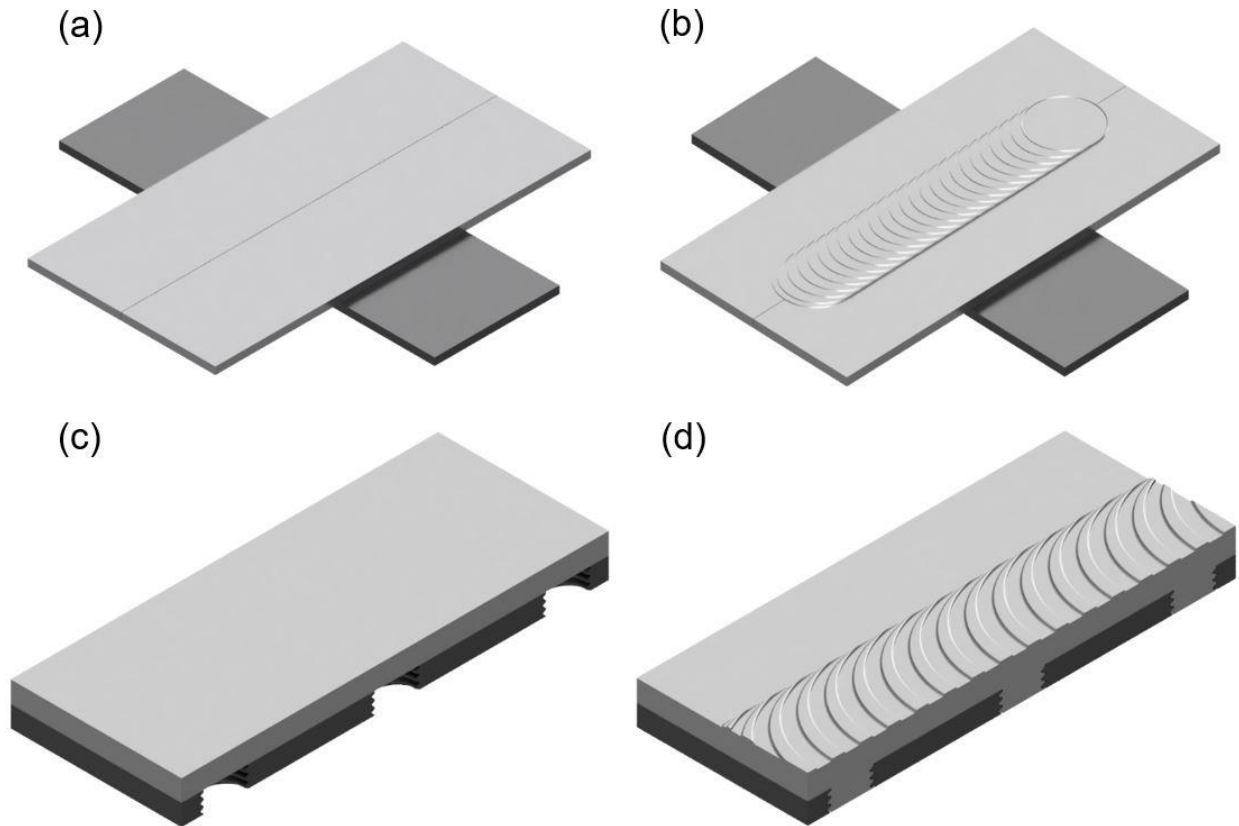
Weld configurations with AA6061 sections above low carbon steel. Holes were drilled and tapped before joint assembly. Sample (a) before and (b) after BFSF. A cross-section of a potential BFSF application with multiple holes along the weld path (c) before and (d) after welding.
